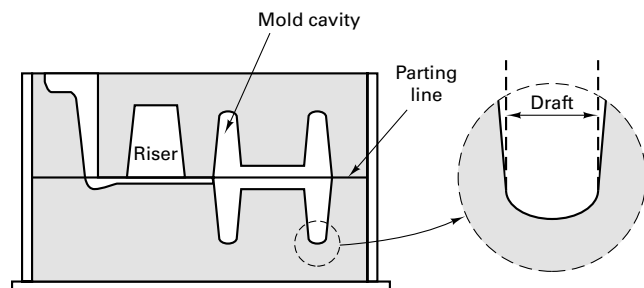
Two-part mold showing the parting line and the incorporation of a draft allowance on vertical surfaces.
